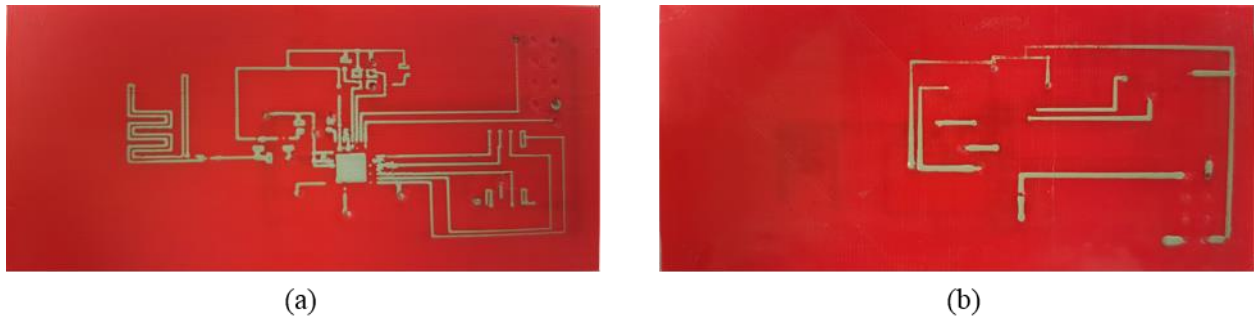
3D printed radio of ESP8266 circuit. (a) Top layer of the board. (b) Bottom layer of the board.
